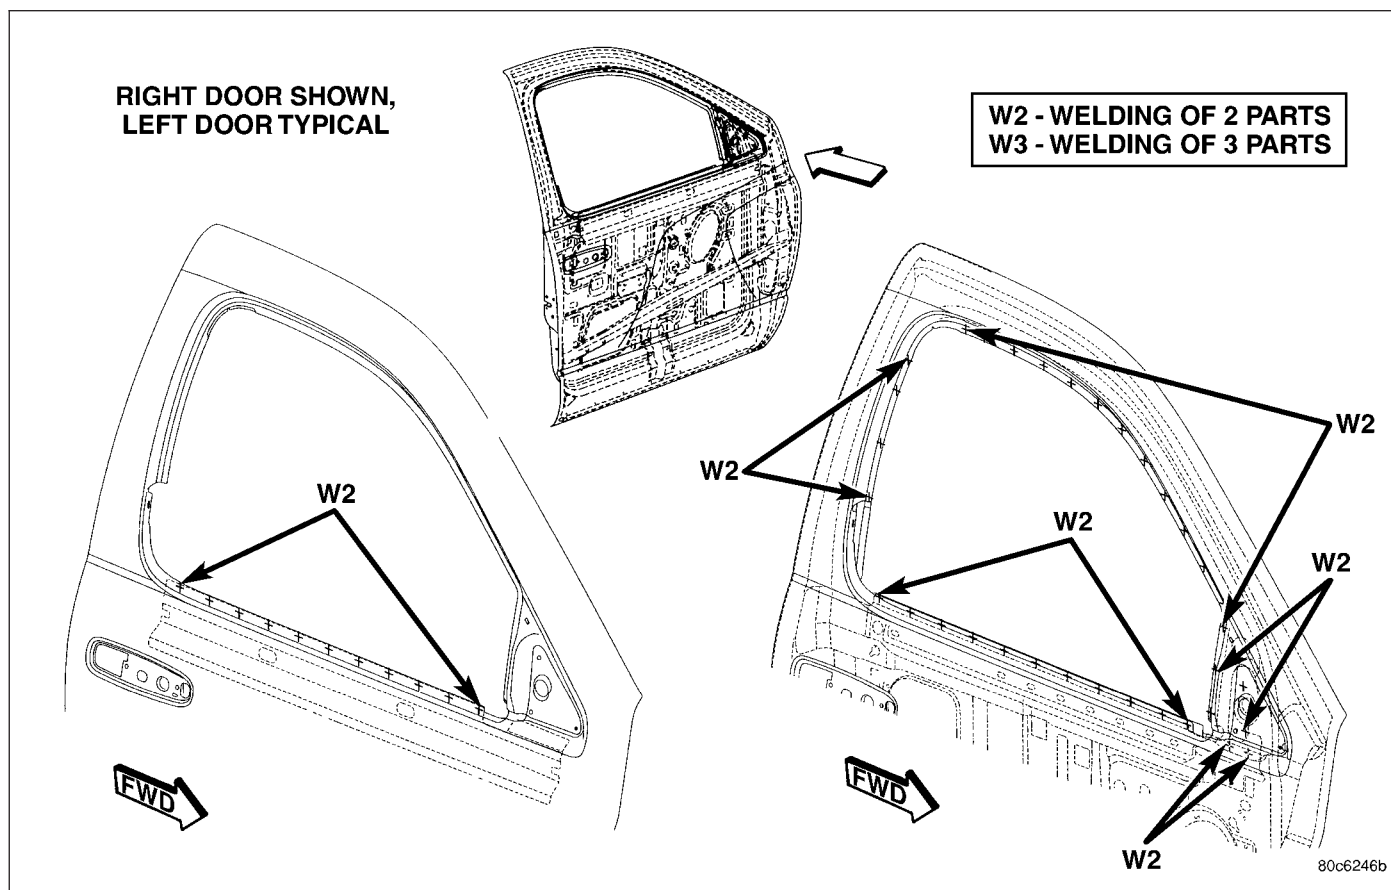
INNER DOOR PANEL - STANDARD CAB
